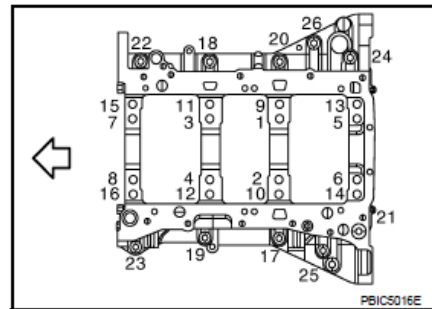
Identifying Lower Cylinder Block Bolts Tightening Sequence
